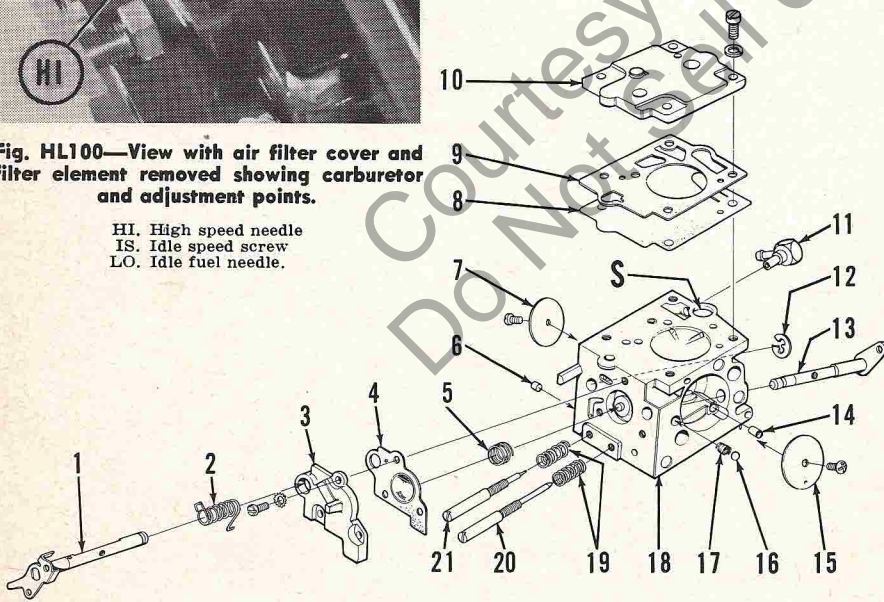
Exploded view of Walbro SDC-1 carburetor assembly except for metering diaphragm, lever and inlet valve assembly; refer to Fig. HL102 for exploded view of these parts. Note that throttle shaft (1) extends through accelerator diaphragm (4) and cover (3).
